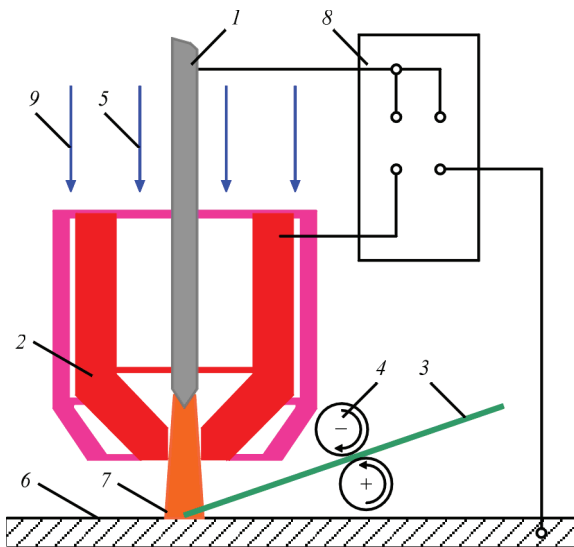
Scheme of plasma brazing process: 1 — tungsten electrode; 2 — plasma-forming nozzle; 3 — brazing filler metal; 4 — feed rollers; 5 — plasma gas; 6 — base metal; 7 — plasma arc; 8 — power source; 9 — shielding gas
